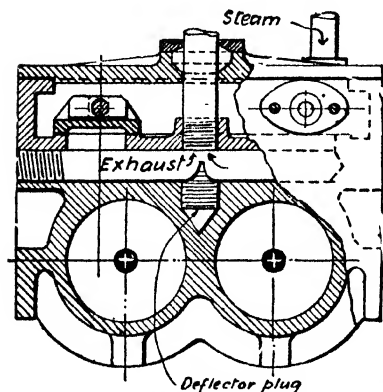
Inside Cylinders with Valve Centre Arranged for Walschaert's Gear.
